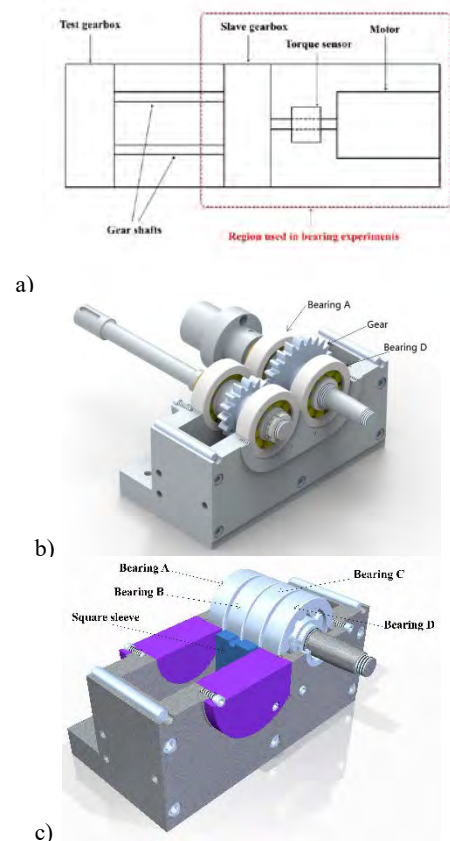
Comparison between original slave gearbox and the bearing test rig: a) shows the location of the slave gearbox on the FZG test rig; b) shows the original configuration of the slave gear box; c) shows the position of bearings in the bearing test rig.
